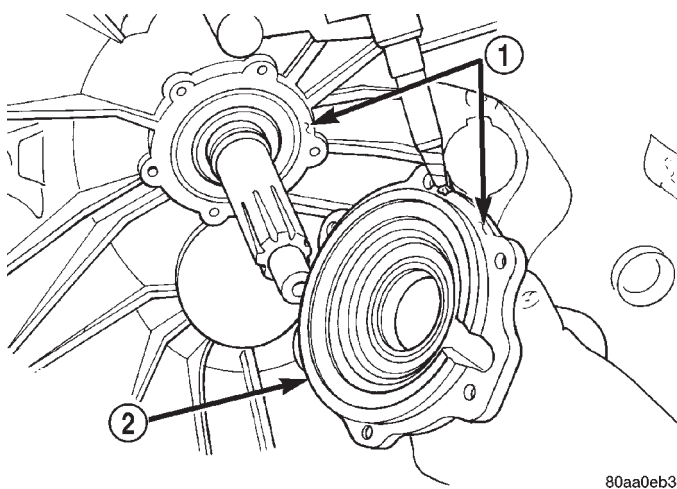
Applying Sealer To Bearing Retainer And Housing—Typical
